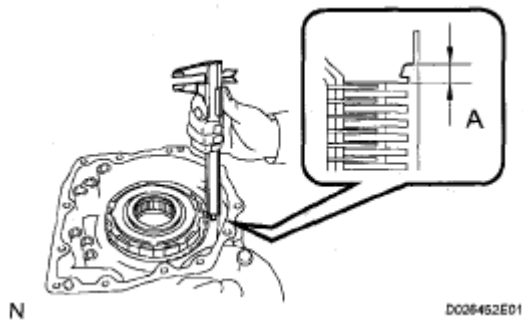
Measuring Distance Between Disc/Contact Surface Of 2nd Brake Cylinder And Transaxle Case
